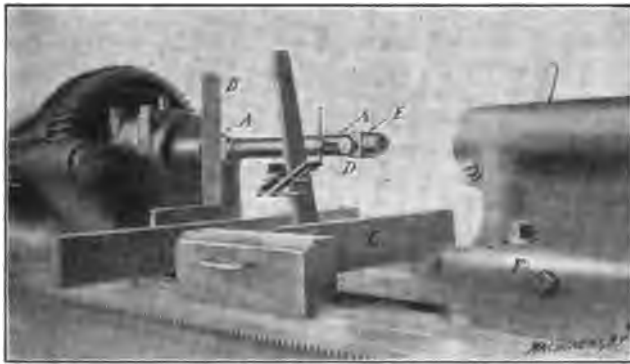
Special Form of Test Bar for Aligning Head- and Tail-stock. Plane Surfaces are used for Testing Parallelism, and Cylindrical Surfaces for Testing Concentricity
